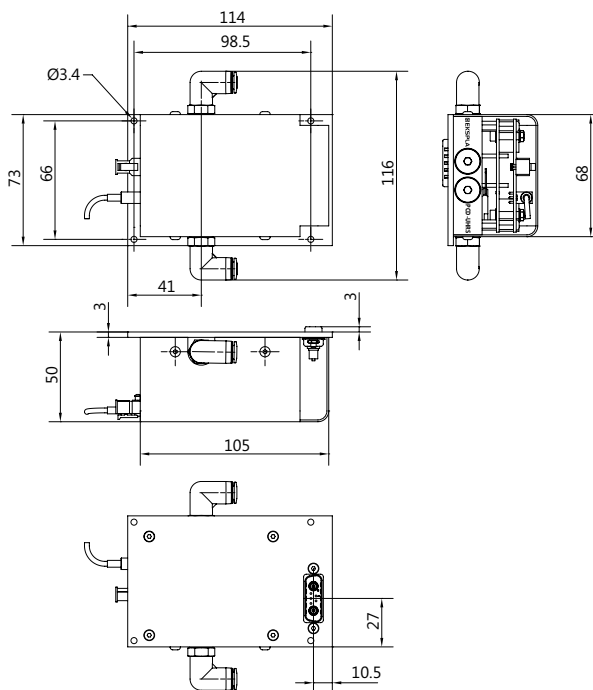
Outline drawing of encased version of driver PCD-UHRS
